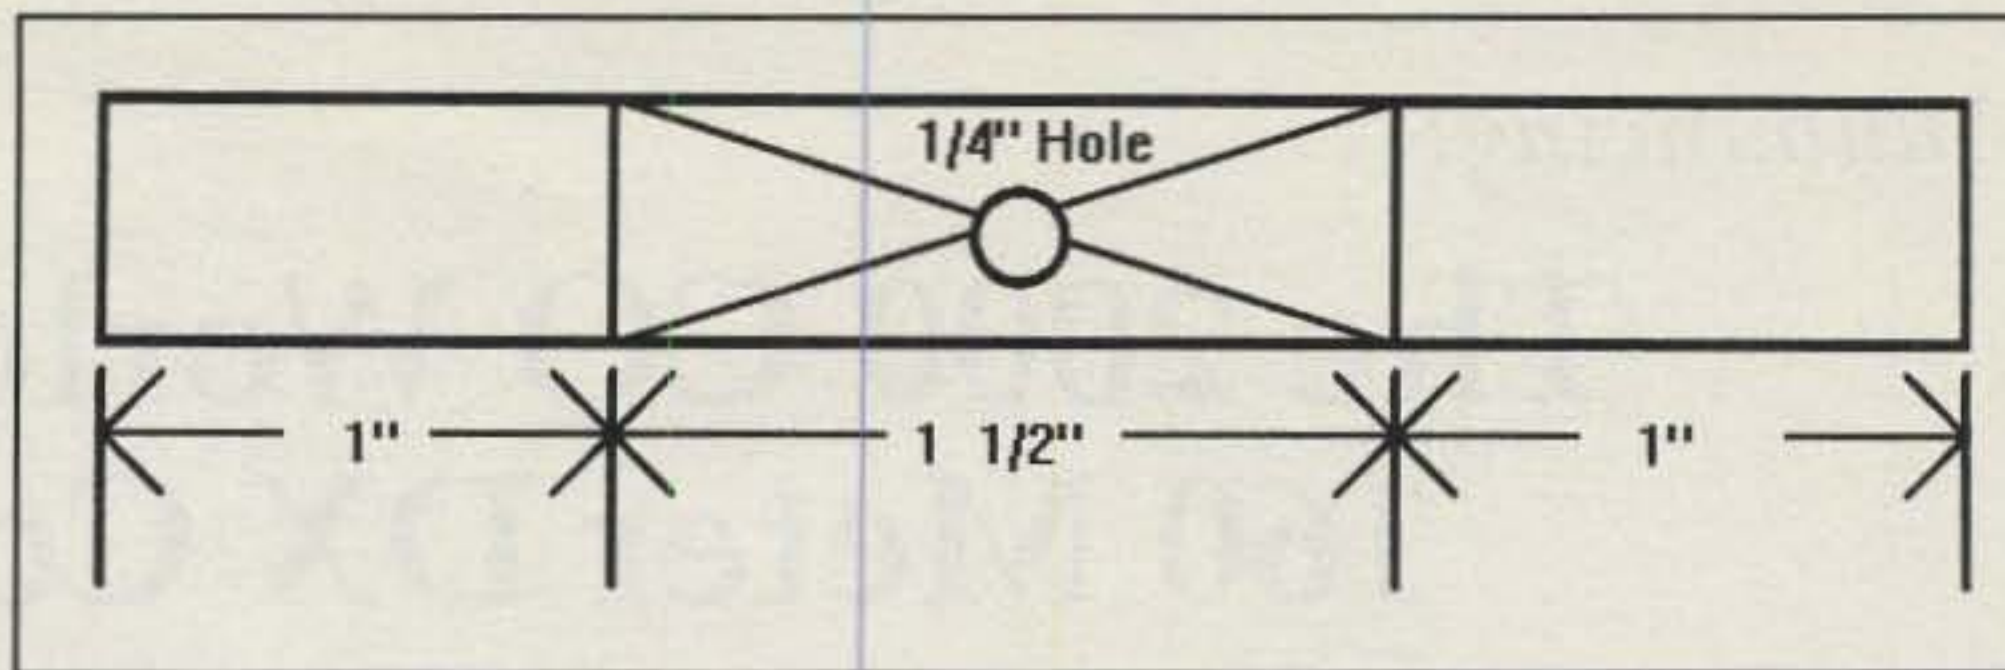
Layout of the 1/2" x .032" brass strip used for the paddles.
